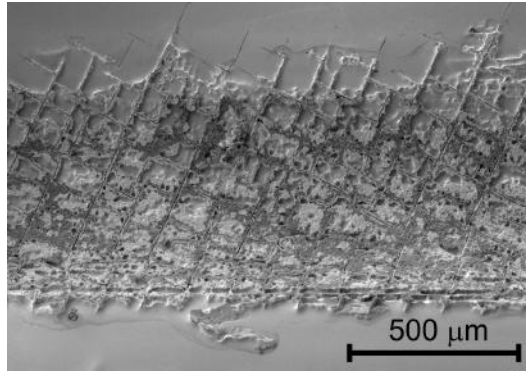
Cracks left on the surface by electro-erosive cutting. The depicted area is a radius where the grinding was not done properly. The top and bottom show well prepared surfaces produced by electrolytic polishing.
